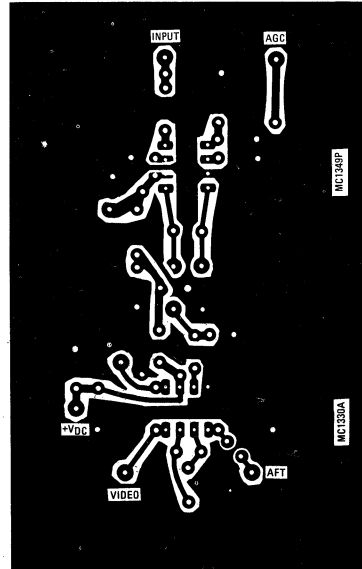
PRINTED CIRCUIT BOARD LAYOUT
